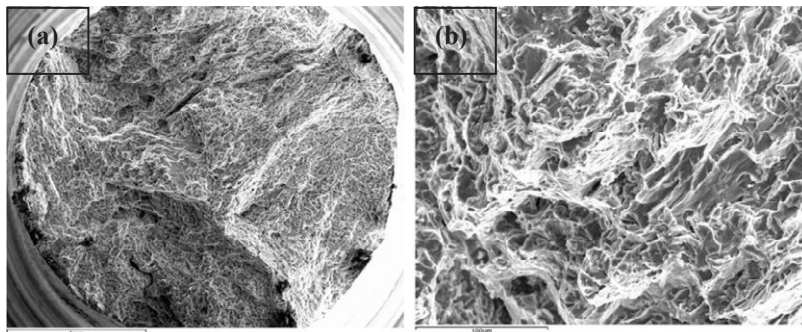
Representative fractograph of all specimen tested in air: (a) overall fracture surface, and (b) evidence of ductile dimples
